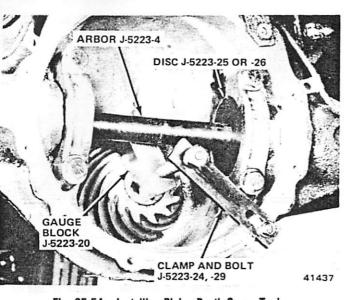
F-54 Installing Pinion Depth Gauge Tools
